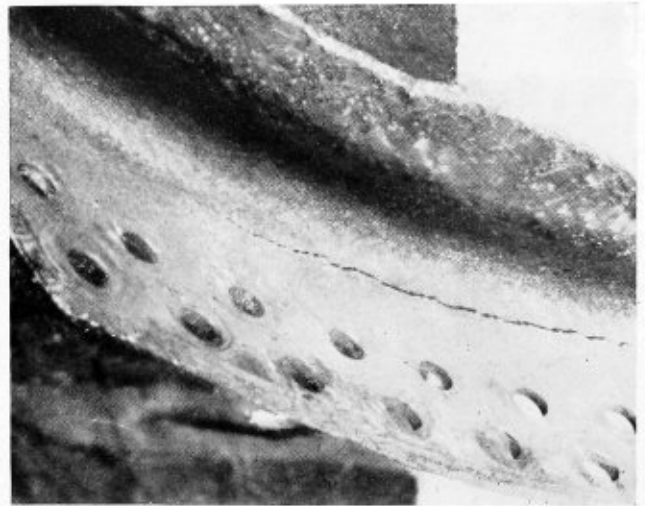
Crack in the flange of a rear flue sheet, in boiler equipped with watertube firebox
